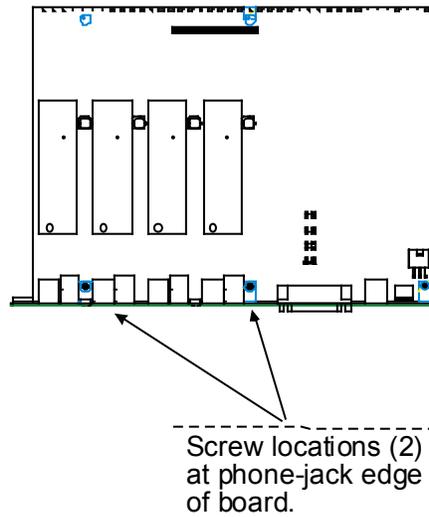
Screws to be removed and replaced with standoffs (phone-jack edge of board; top view)
